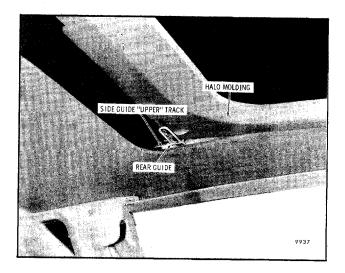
Rear Halo Molding Guides in Side Guide Track - C Styles
